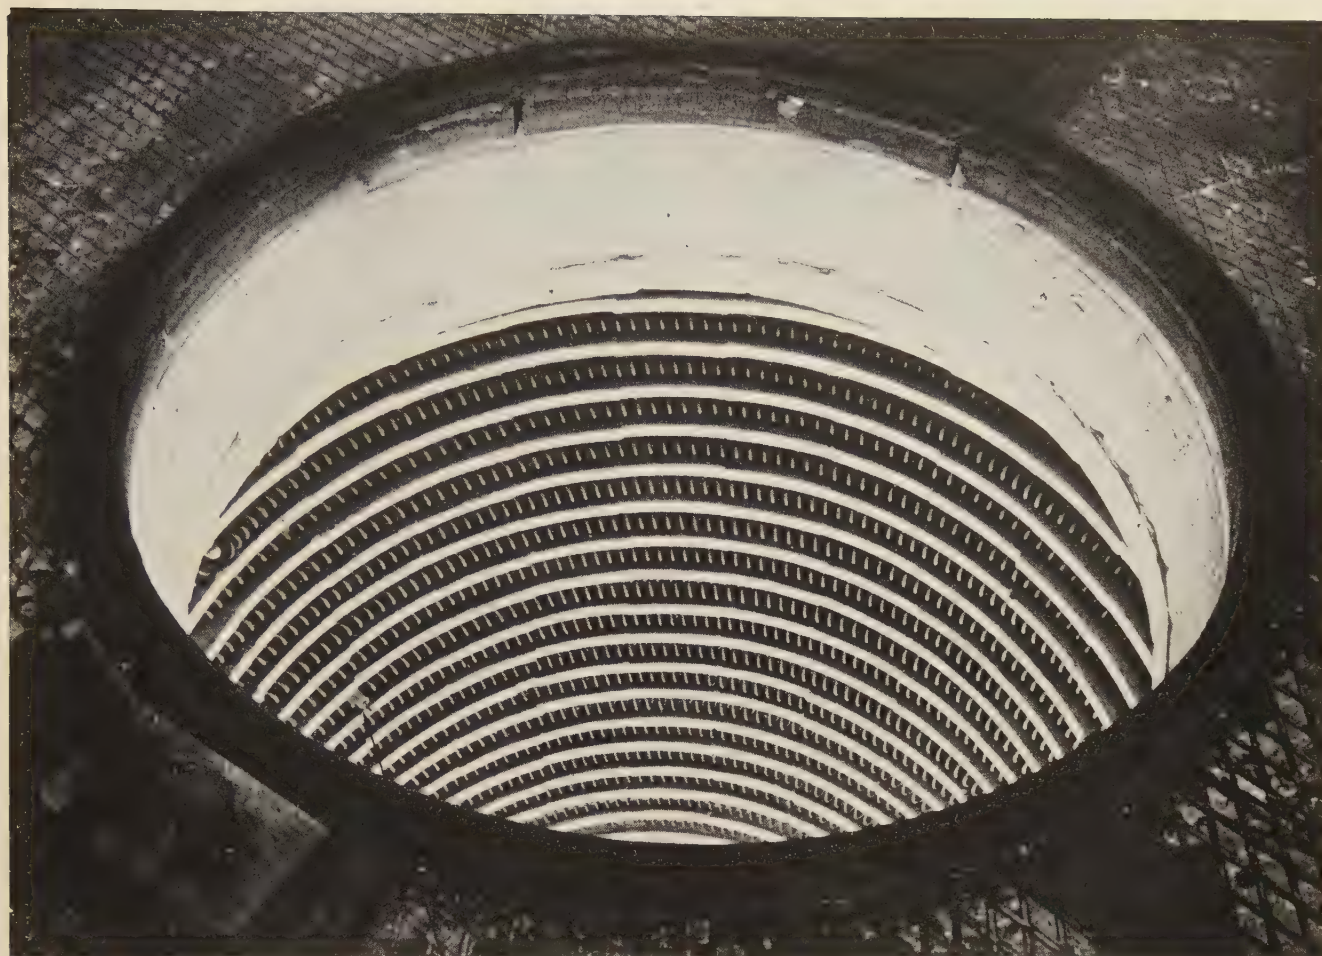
Coils of Steel Strip Mounted on Base-Plate after Bright Annealing
